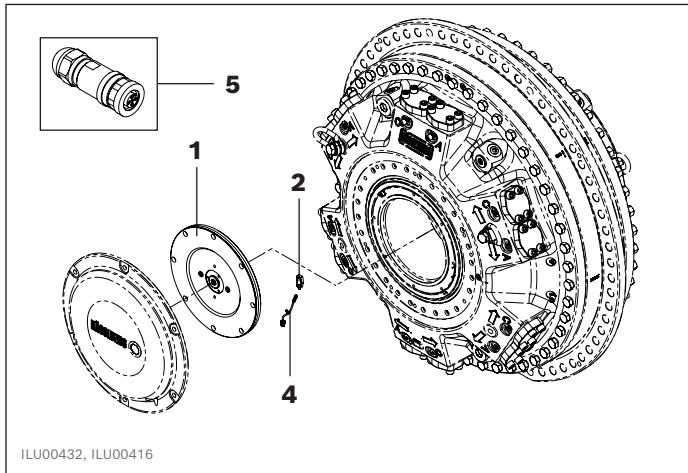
Parts in the Hägglunds SPDC for Hägglunds CBm
